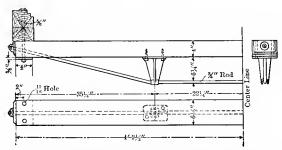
Needle Beam Trussing for New York, New Haven & Hartford Wooden Day Coach.
